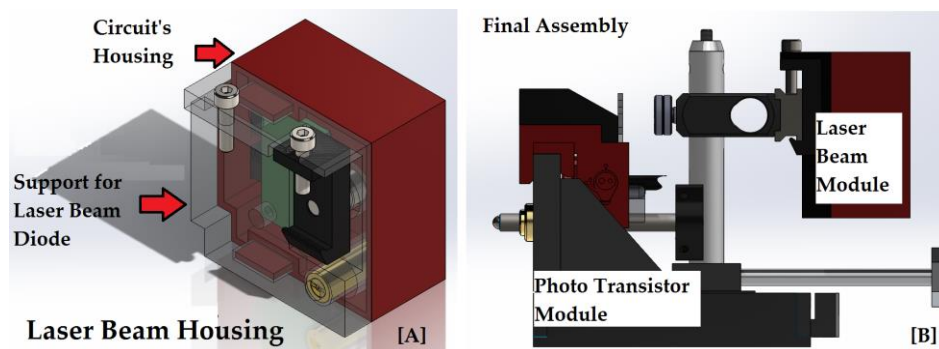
(A) Laser beam housing . (B) Final assembly of the laser emission module with the phototransistor module.
